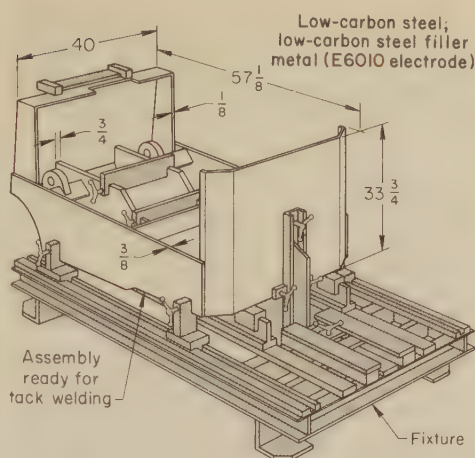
Sixteen-component assembly mounted in a fixture and ready for tack welding (Example 2)
